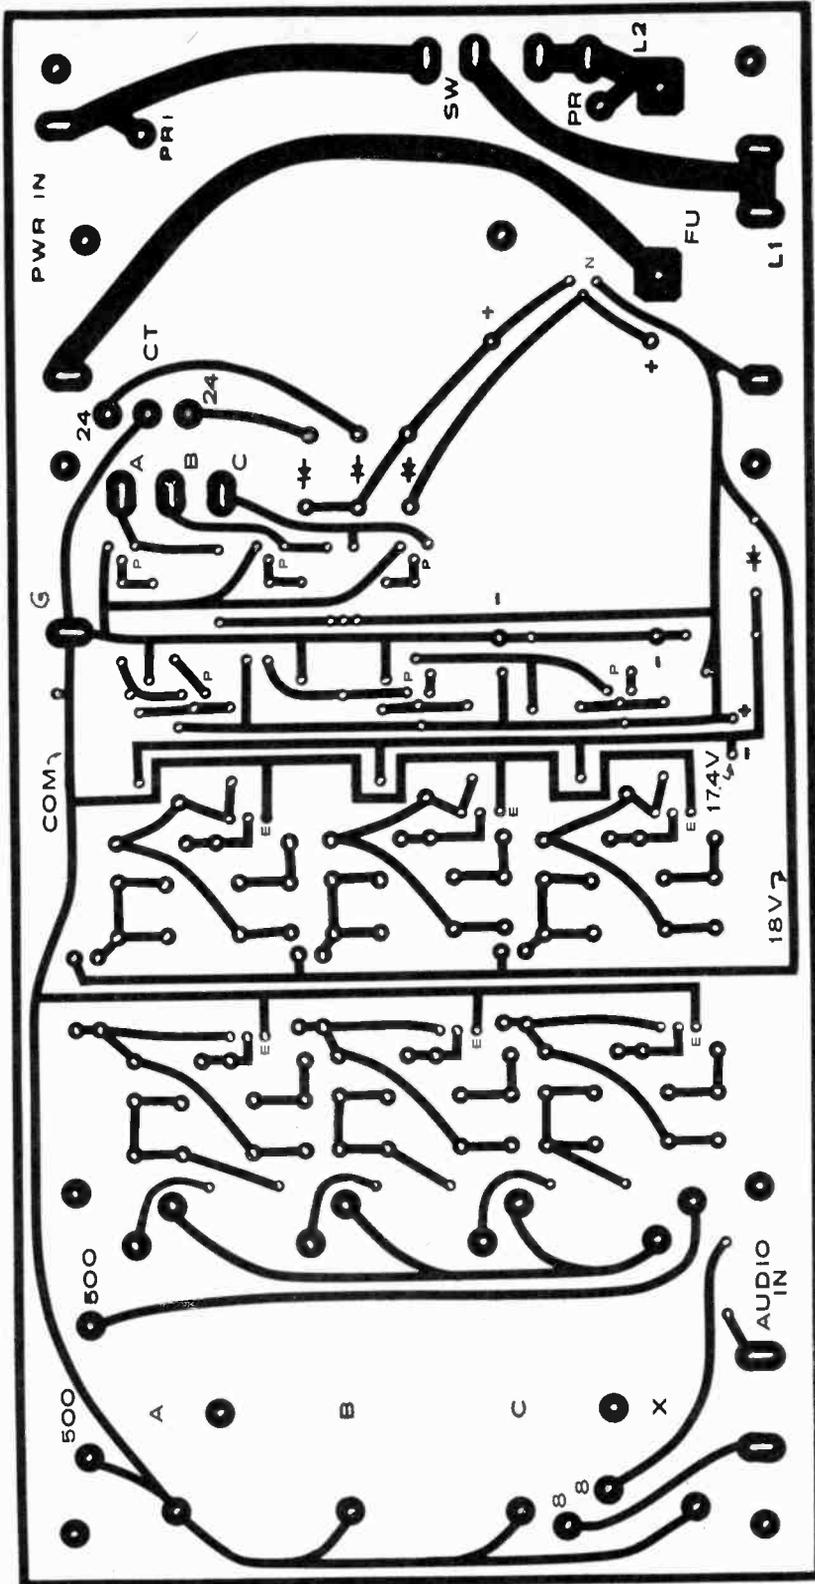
You can copy this actual-size foil pattern for the QFU PC board or buy the board ready-made.
